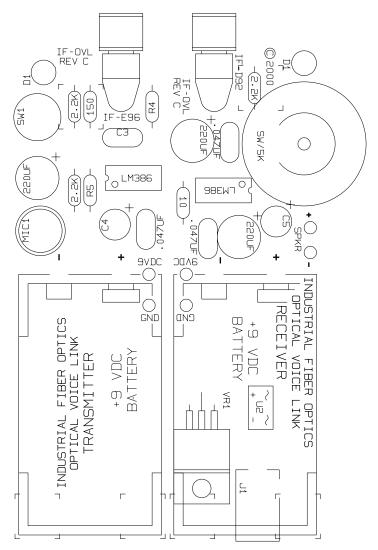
Board details of the transmitter and receiver printed wiring boards.
